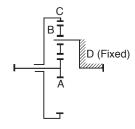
(b) Solar Type Planetary Gear Mechanism
